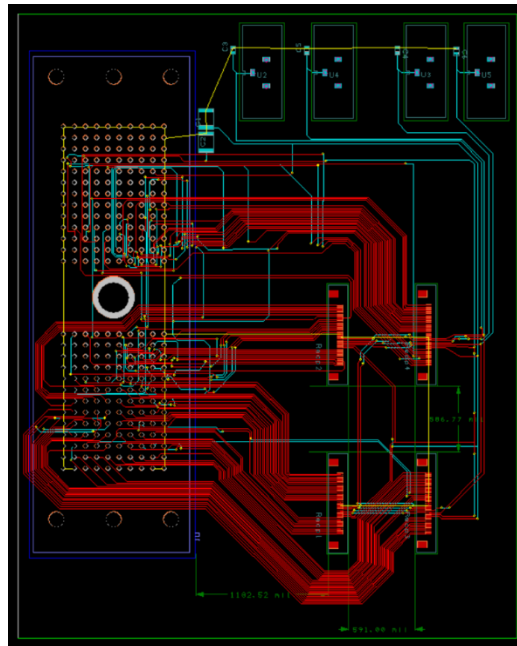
5x4.5 square inches two layer PCB designed for breakout module.
